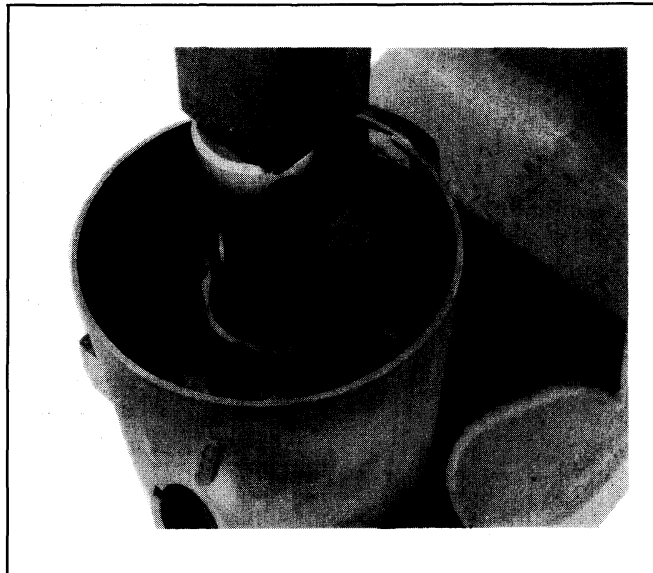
B-108--Removing Upper Bearing and Retainer-Corvette
